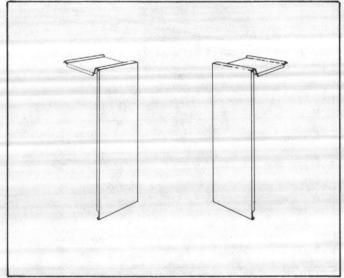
Enclosure Extensions (Left-hand and Right-hand)
